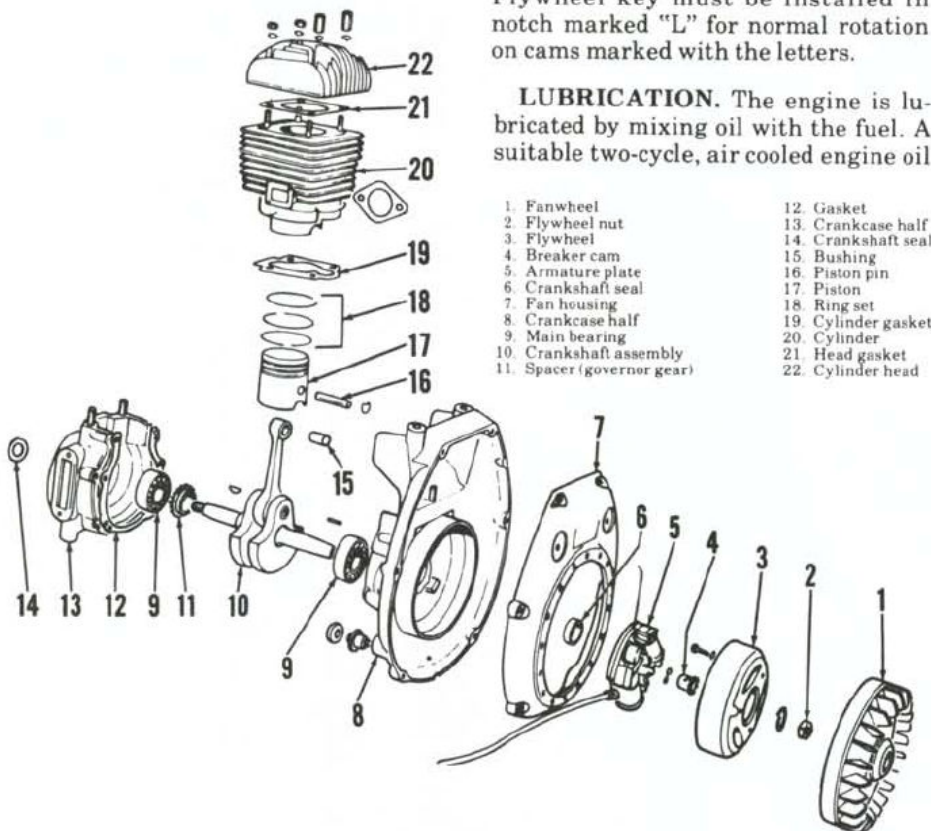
Exploded view of JLO L252 engine. L152 is similar.
